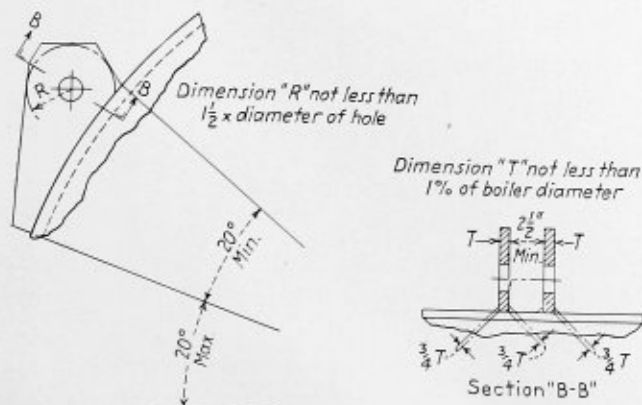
Welded bracket connection for horizontal-return tubular boiler
